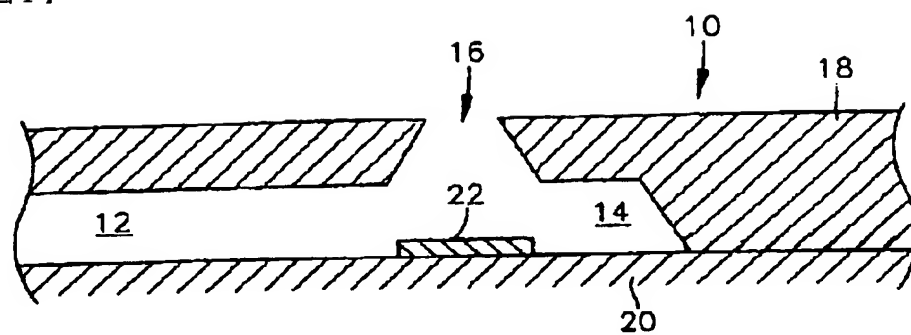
, 4 and 5 are an cross-section views of alternative configurations of ink supply channels, firing chambers and nozzle holes of a nozzle plate of the invention;
